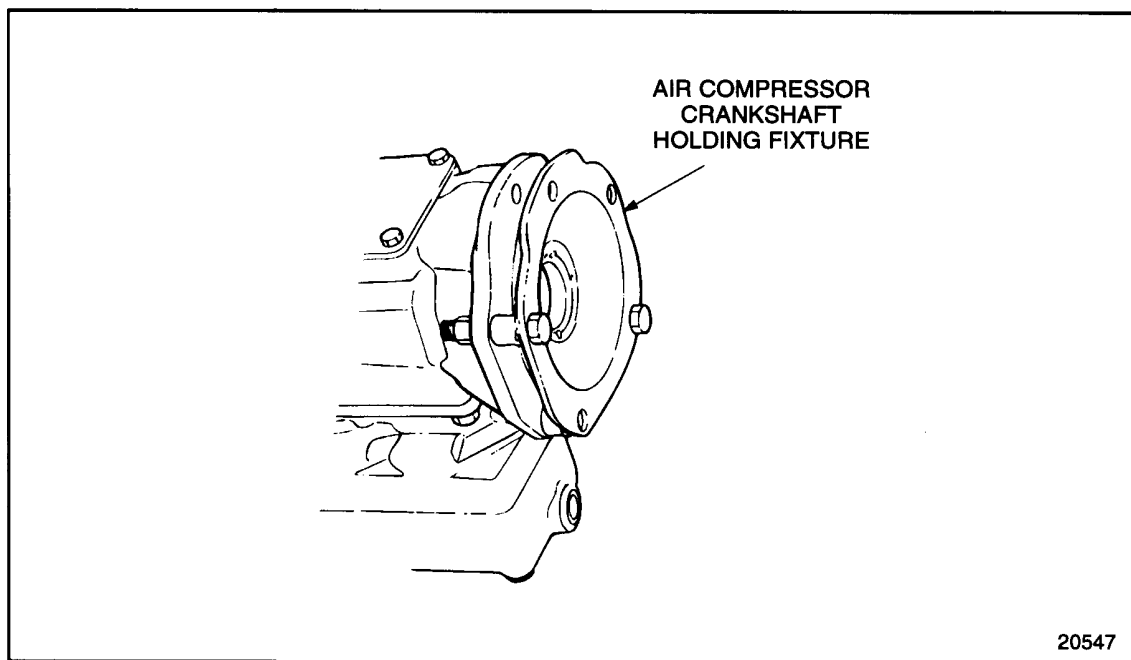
Air Compressor Crankshaft Holding Fixture Installation
